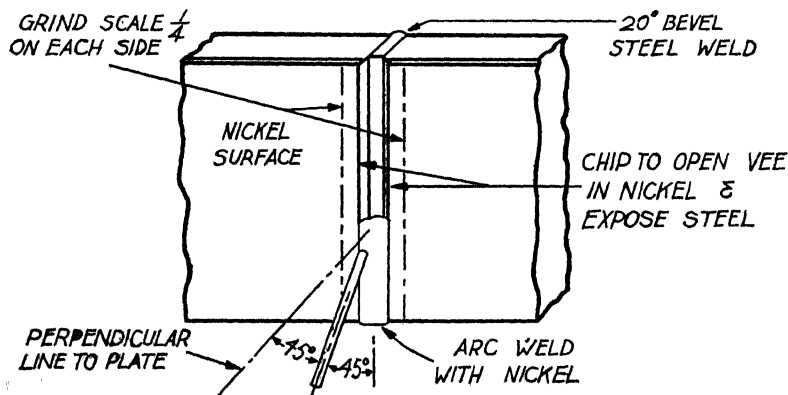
Vertical welding of nickel-clad steel by metallic arc.
